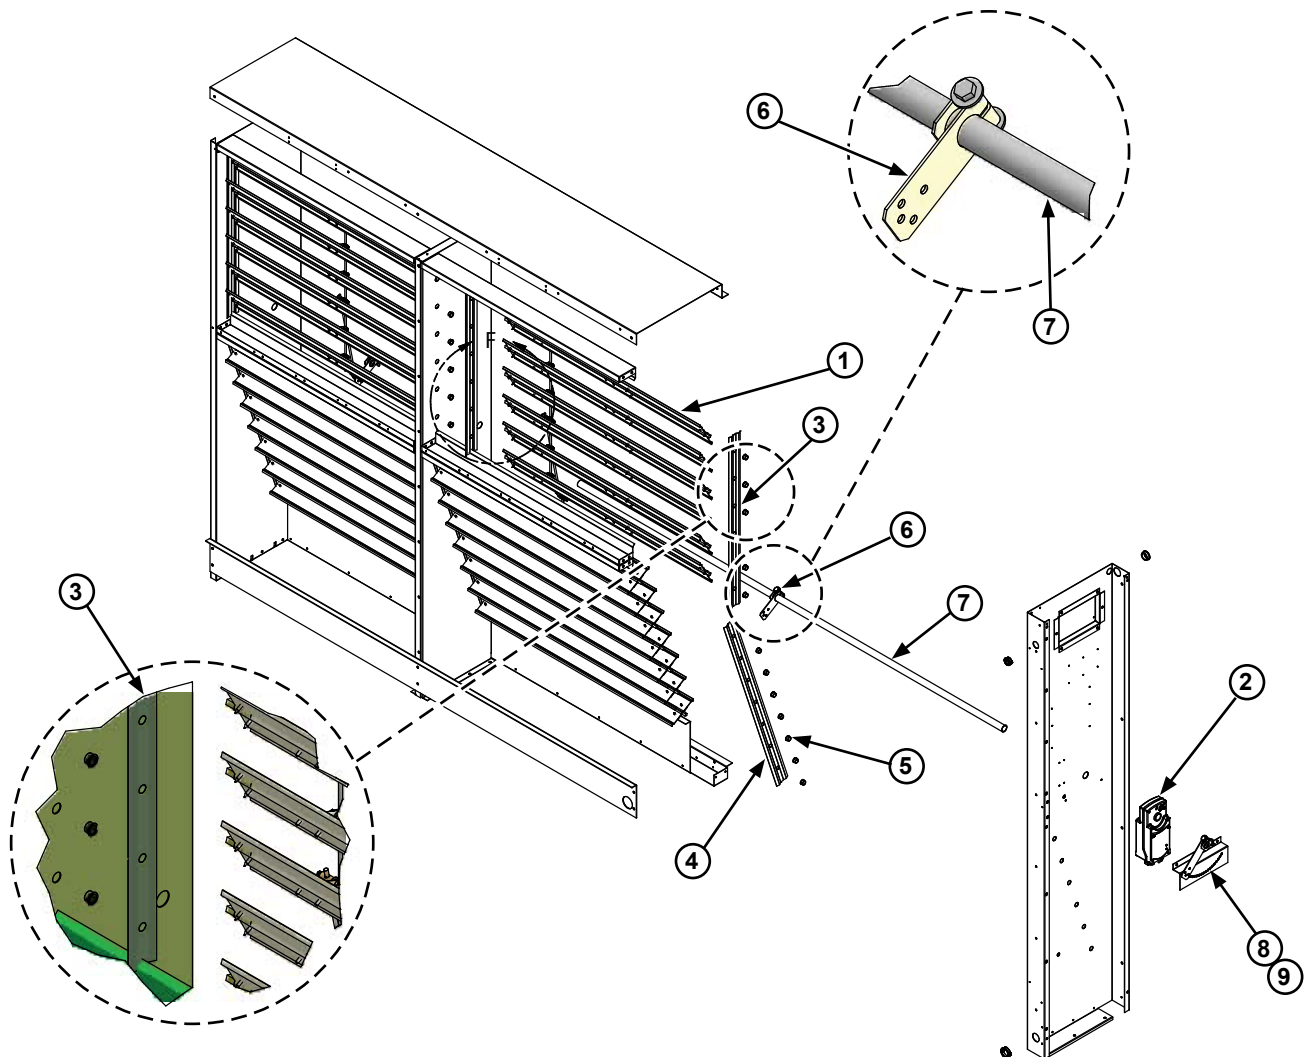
OUTDOOR/RETURN DAMPER ASSEMBLY
